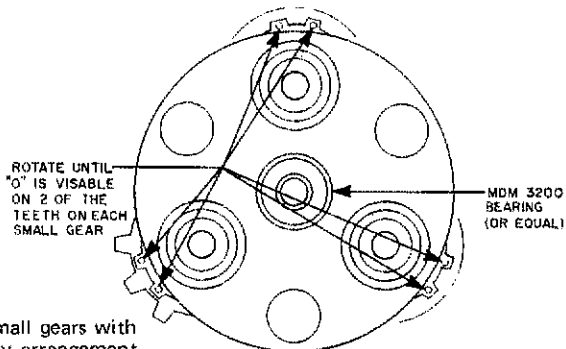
This drawing shows the small gears with the "Os" pointing out, the necessary arrangement when reassembling the gear housing.
